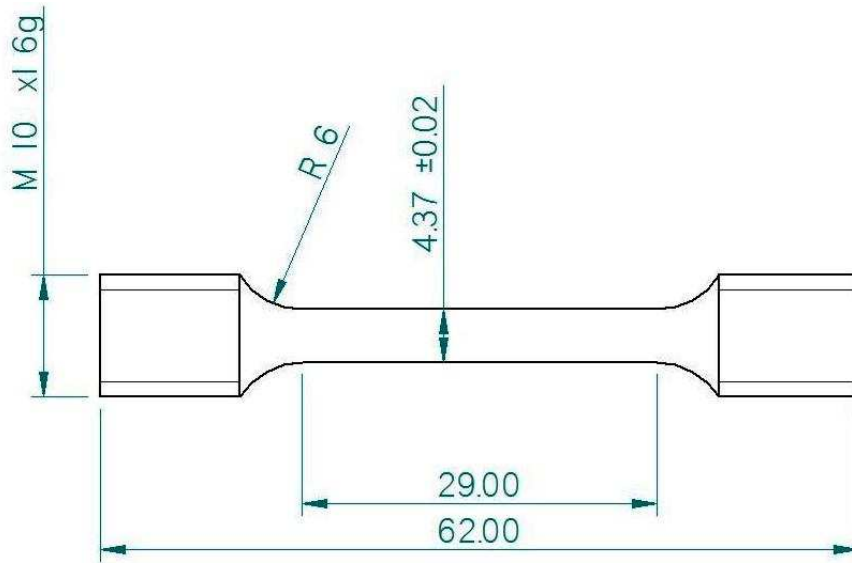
Tensile specimens with dimensions in mm machined from brake callipers.
